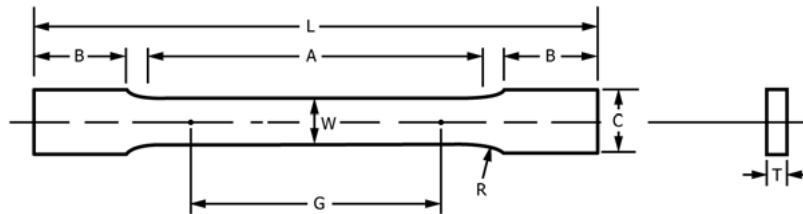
Dimensions of rectangular subsize tensile specimens as defined by the ASTM E8/E8M standard.
